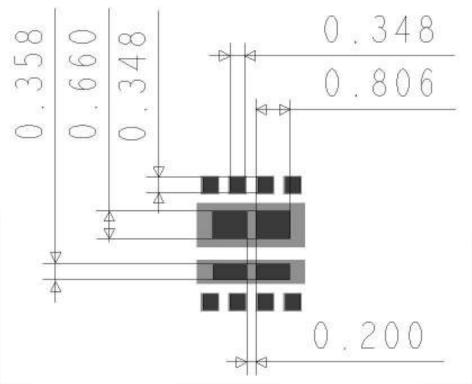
Dimensioned Stencil Apertures, Edge Pins and "D1" Pad Dimensions
